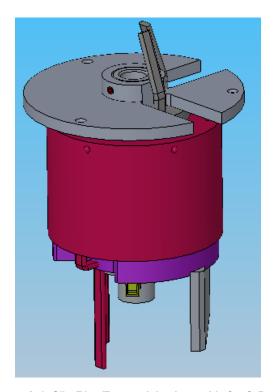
Slip-Ring/Rotary-Joint Assembly for OrBand
